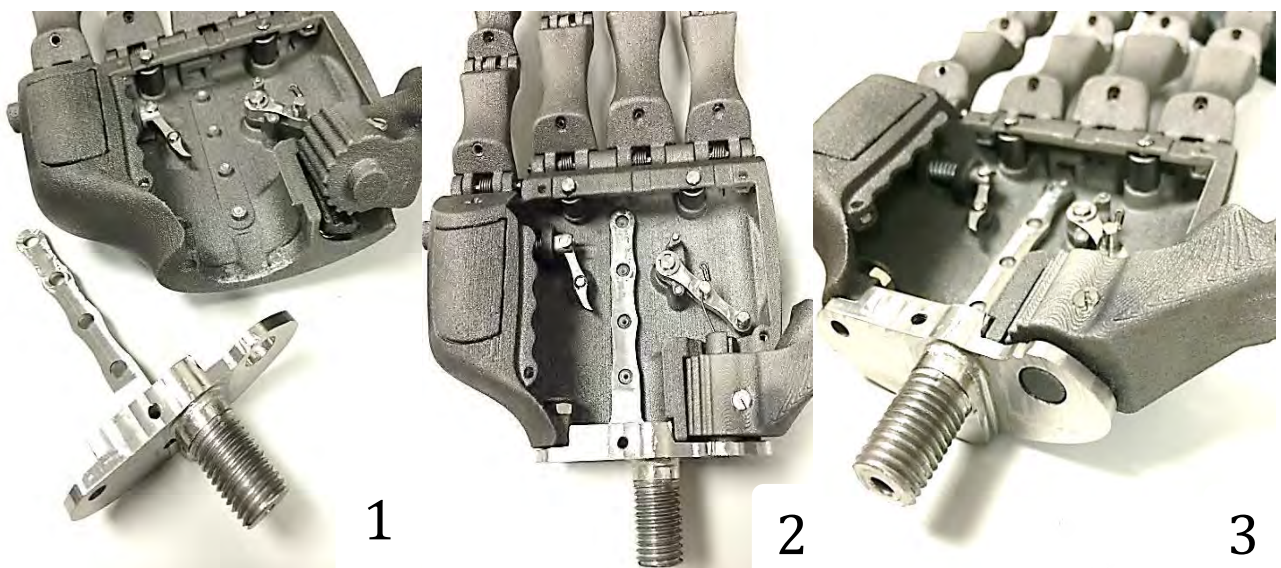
Wrist-stem and linear-bearing rail assembly stages (Part 1).
